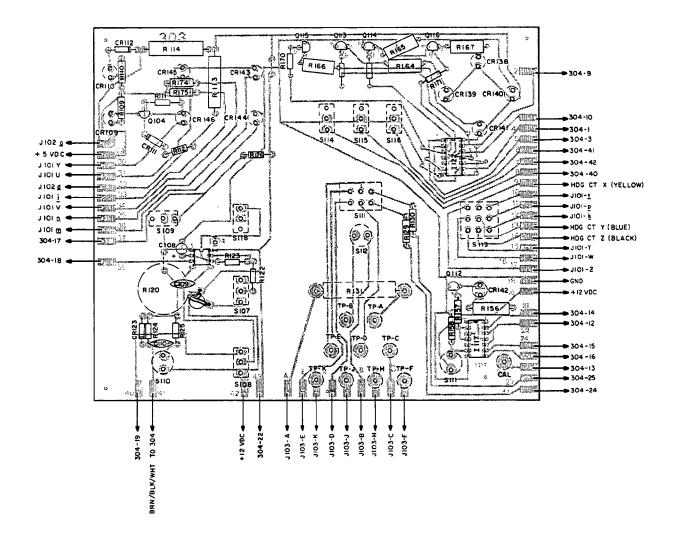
P.C. BOARD ASSEMBLY, BOARD 303, DRAWING (Dwg. 300-05987-0000 Rev. 0)
